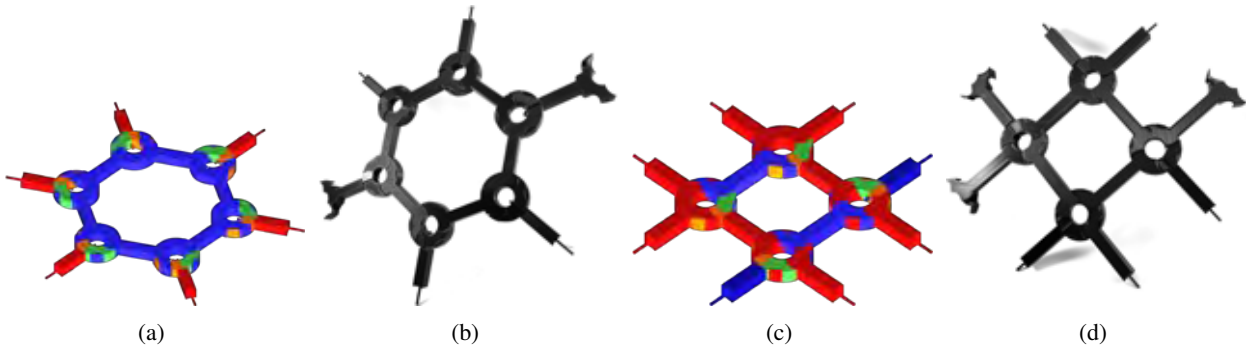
Design and Fabrication of modular elements to construct 2D frames: (a) Design of Hexagonal frame, (b) Physical Assembly after fabrication, (c) Design of Quadrilateral frame, (d) Physical Assembly after fabrication
